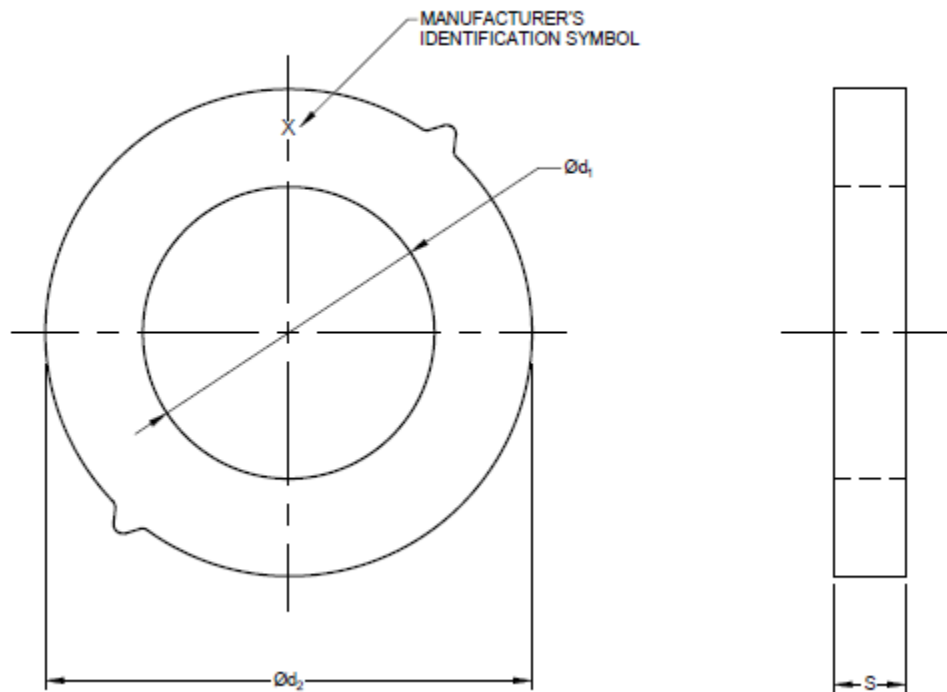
PLAIN HOLE CIRCULAR WASHERS (TYPE A)
